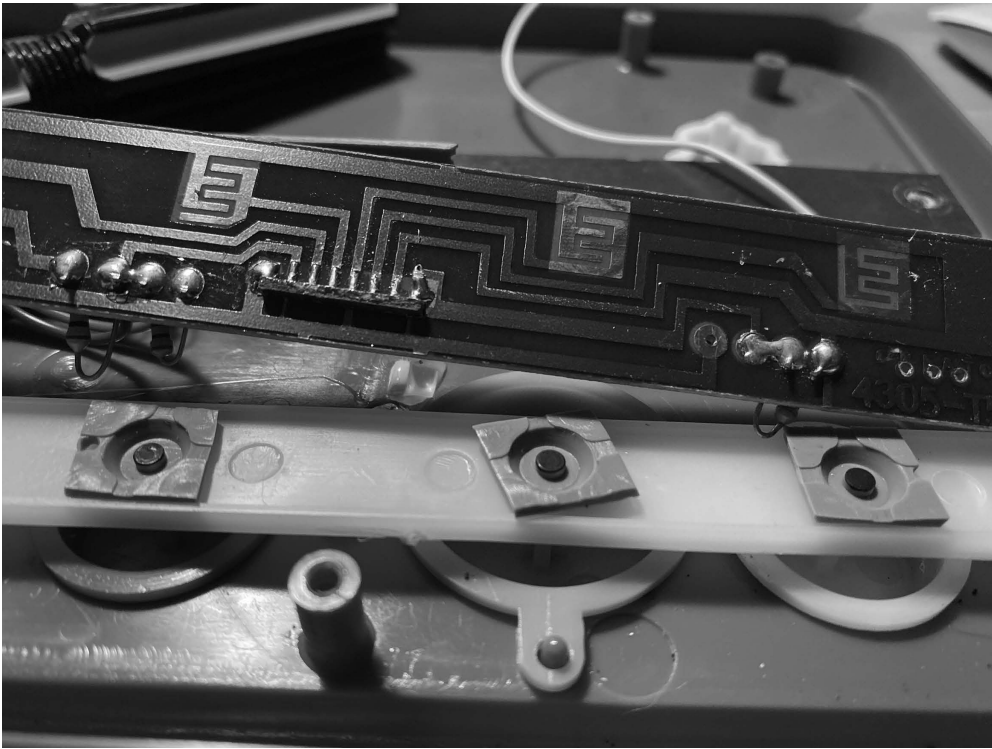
Toy button assembly—interlocking circuit traces—common PCB trace.
